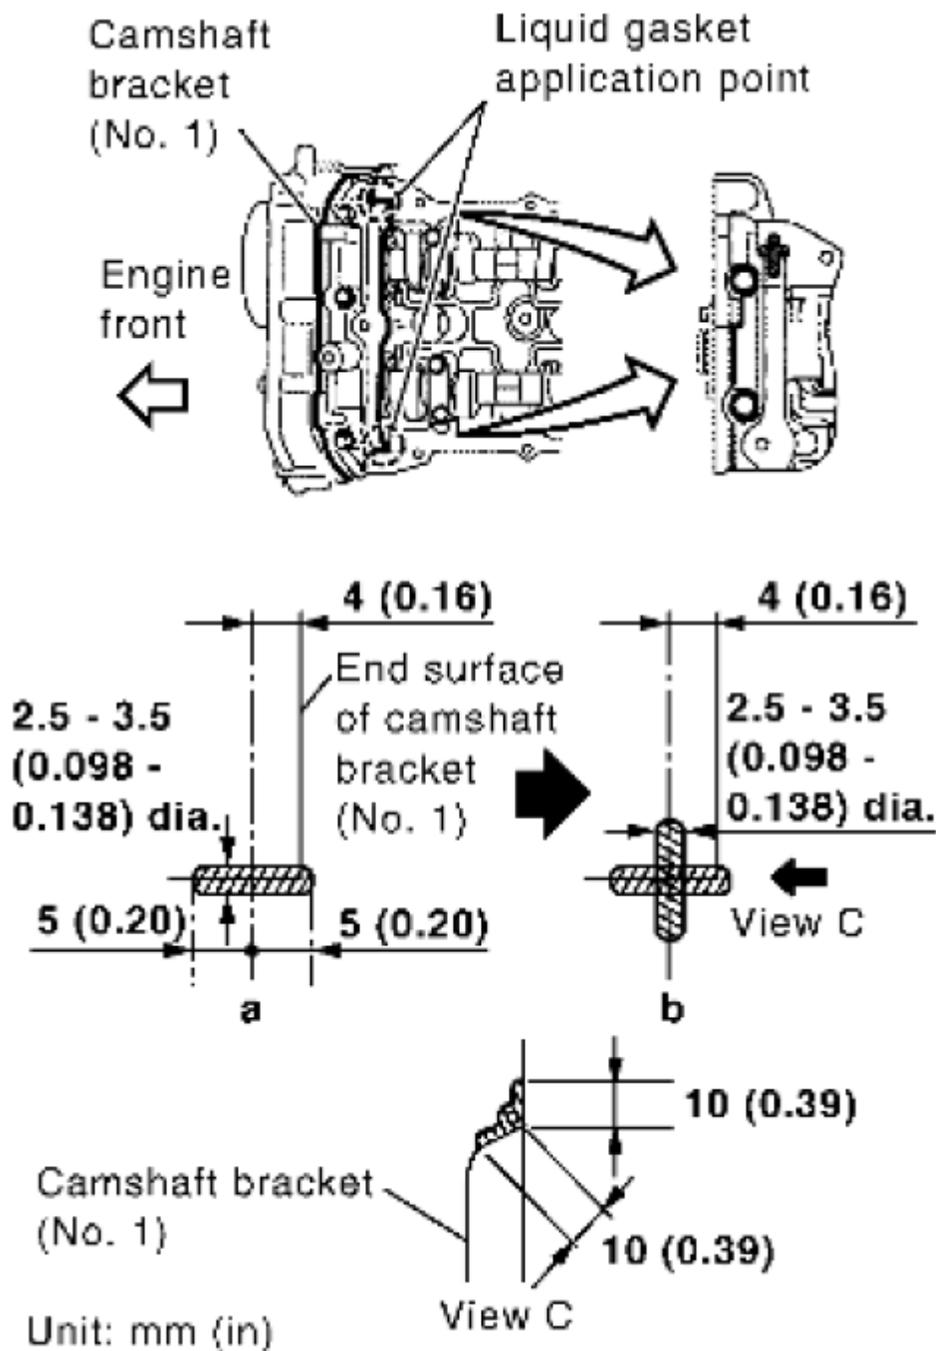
Identifying Liquid Gasket Applying Specifications On Joint Of Rocker Cover, Cylinder Head And Camshaft Bracket (No. 1)
